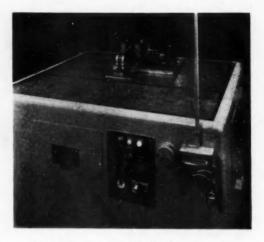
Fixtures for a torsional fatigue test af a section of track chain assembly of crawler tractor in the International Harvester laboratory were simple in design. A Baldwin SF-10-U machine of 10,000 lb capacity was used.
